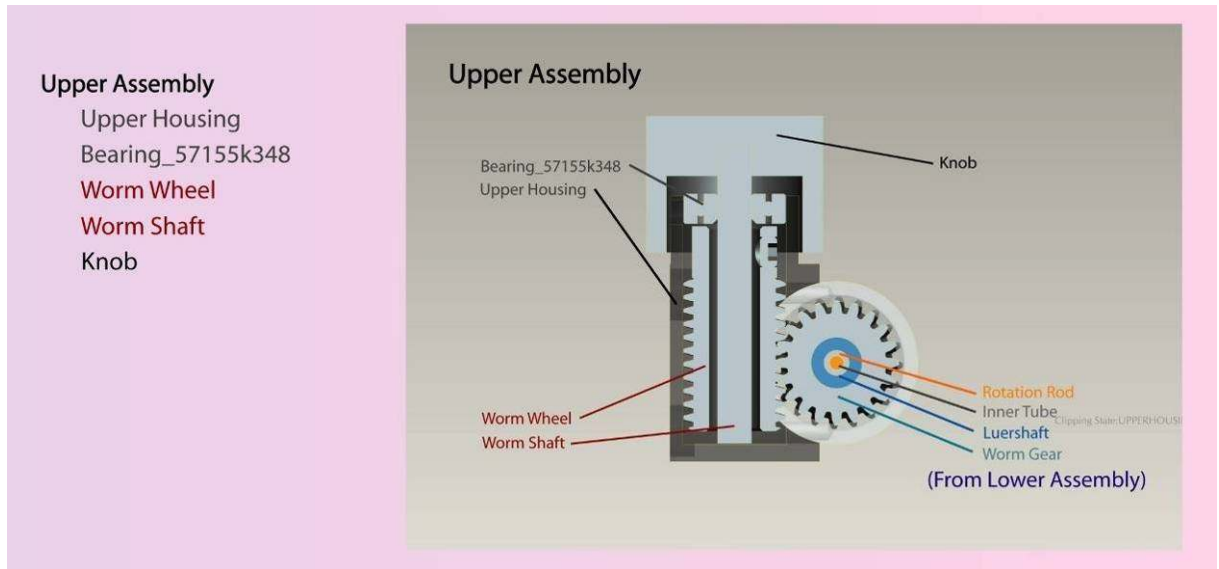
Upper housing of the mechanical controller. The rotational system (worm gear, worm wheel, and turning knob) are displayed. A transverse cross sectional view of the lower assembly and the direct drive mechanism is also displayed.
